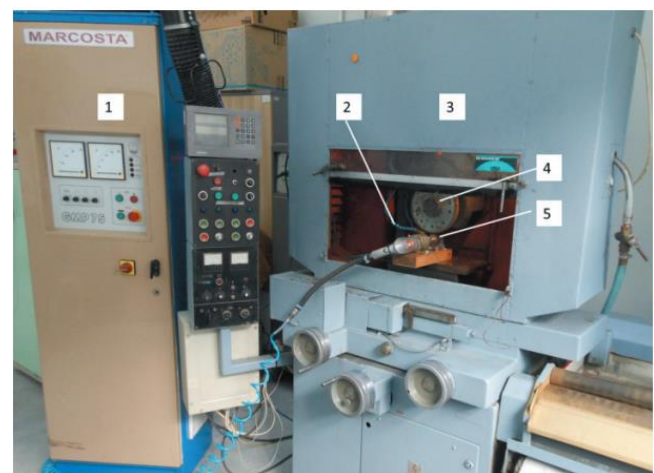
View of the electro-discharge grinding station: 1 - electric pulse generator, 2 - dielectric feeding nozzle, 3 - surface grinder ECBT8, 4 - grinding wheel, 5 - rotating electrode
